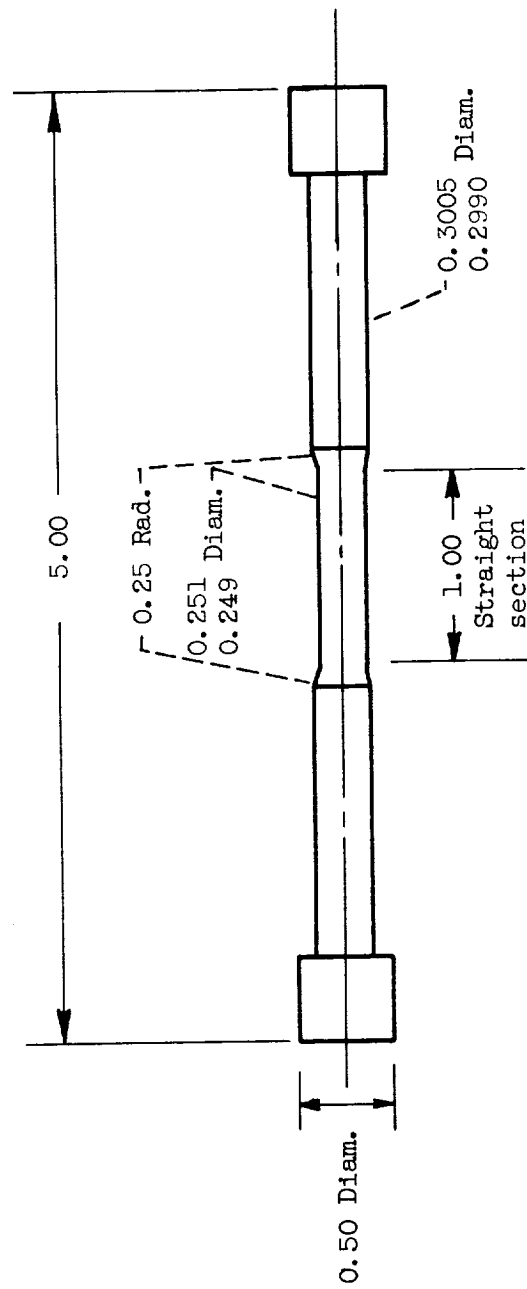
Button-head tensile specimen. (All dimensions in inches.)
